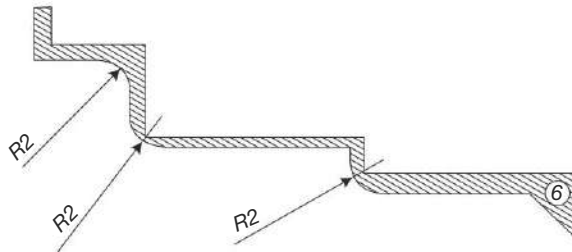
Finish cut to be taken for the part shown in Fig. 14.15
